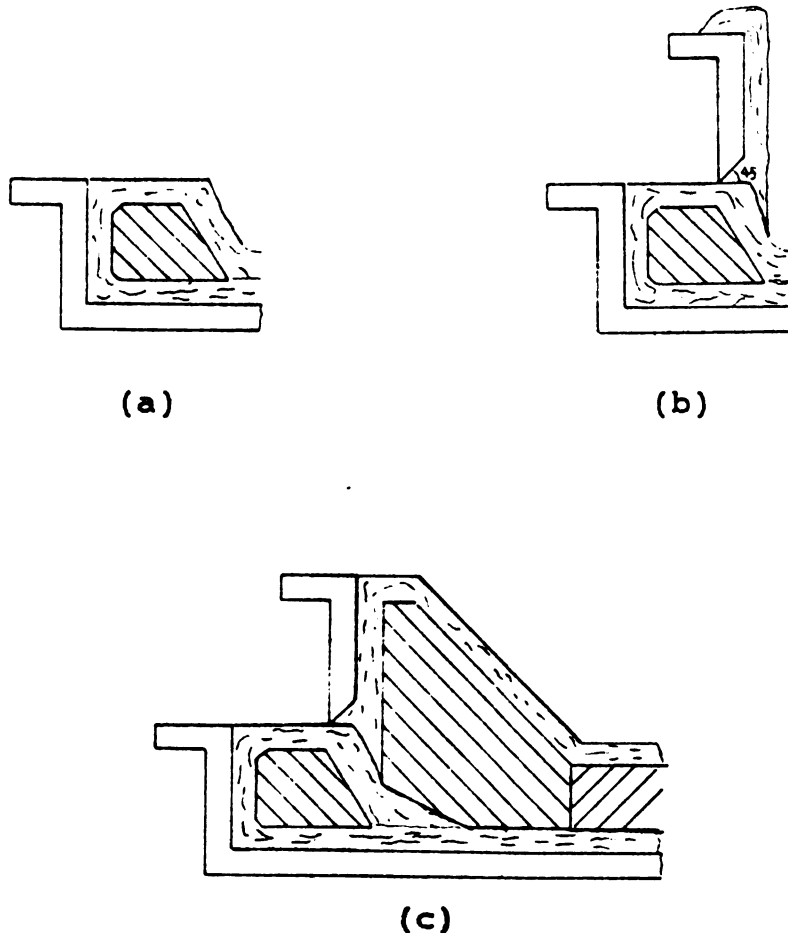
Moulding Technique for Rising Shutter Edge (Reference 14).
